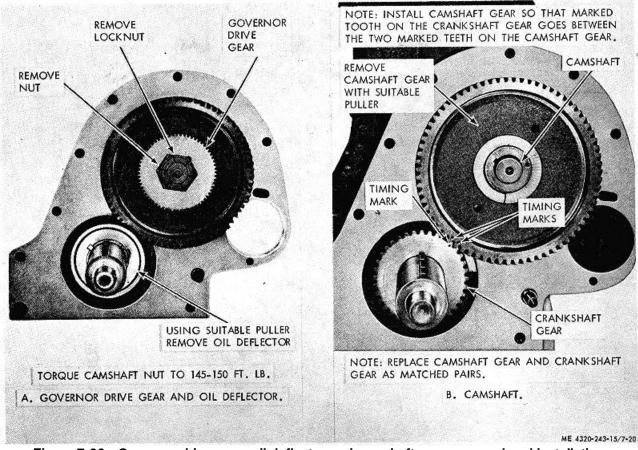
Governor drive gear, oil deflector and camshaft gear, removal and installation.
